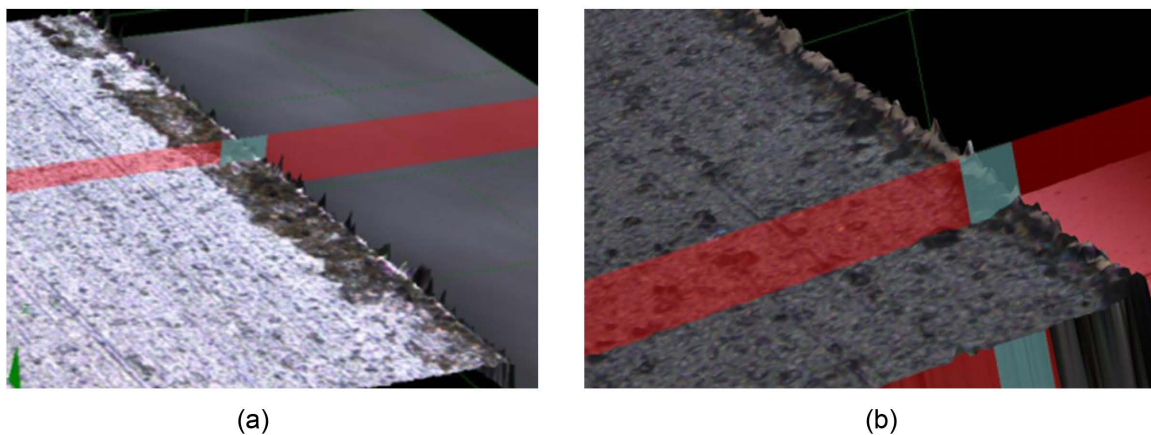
Section morphology of mechanical cutting and laser cutting. (a) Mechanical cutting; (b) Laser cutting
